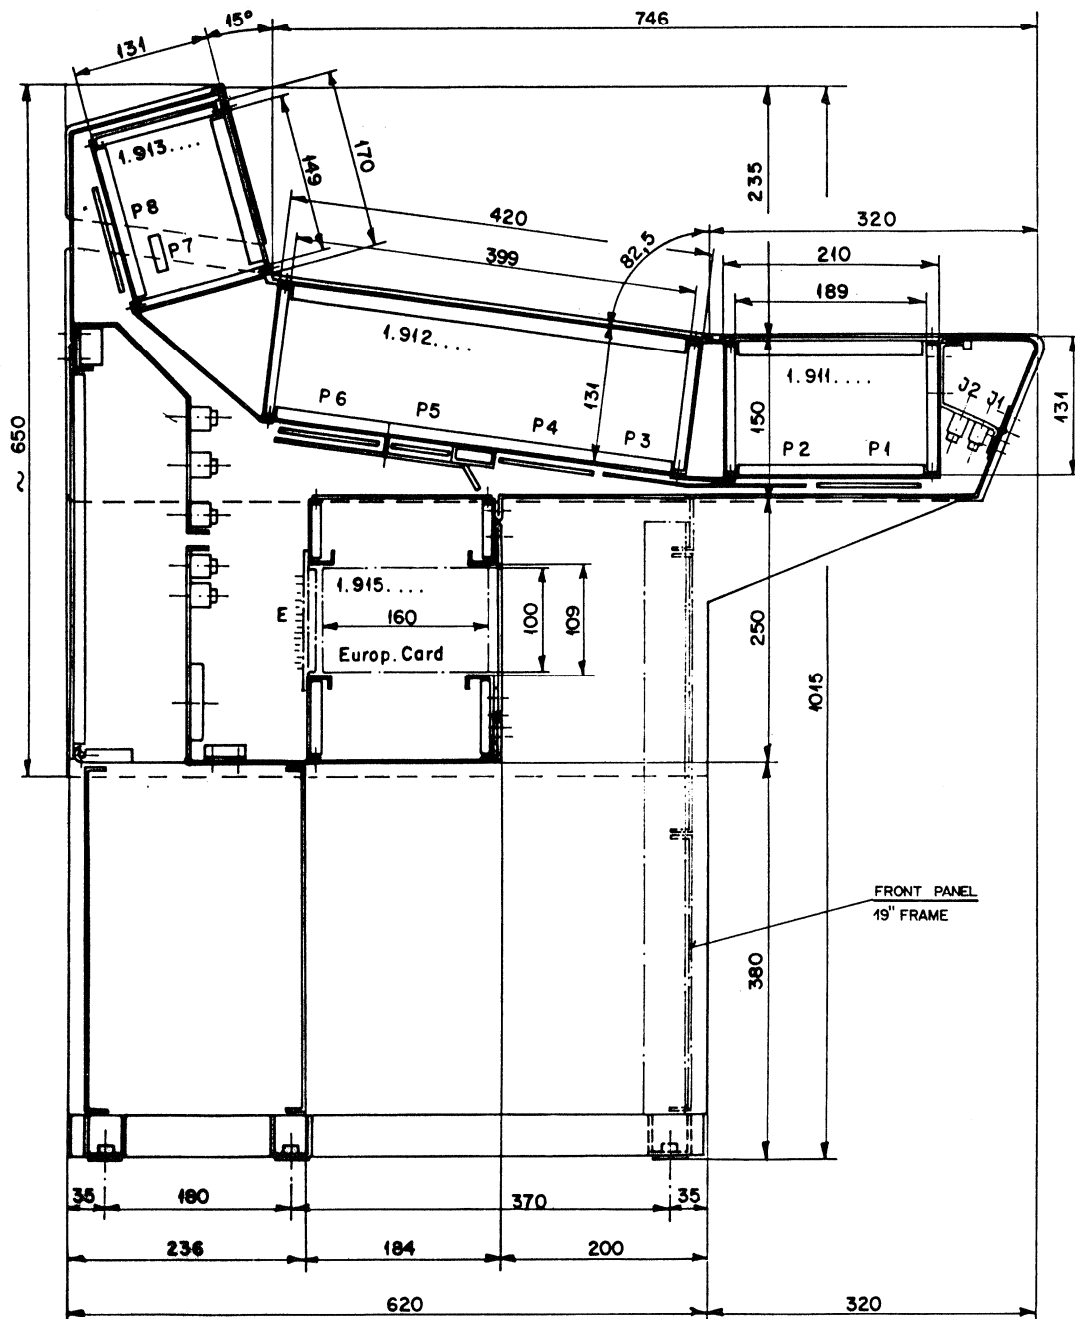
Dimension drawing of the two chassis widths for the two basic versions with 3 and 4 module sections respectively.
